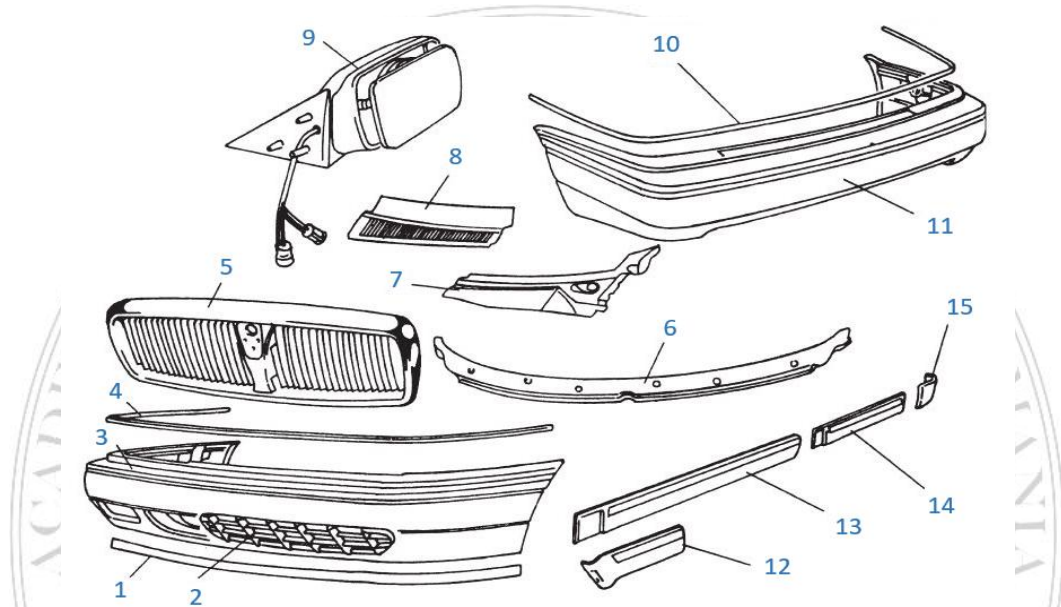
Legend: 1- front spoiler, 2-lower front grill, 3-front bumper, 4-front bumper insert, 5-front grill, 6-lower screen molding, 7-scuttle molding, 8-scuttle grill, 9-door mirror assembly, 10-rear bumper insert, 11-rear bumper, 12,13,14,15 waist moldings.
